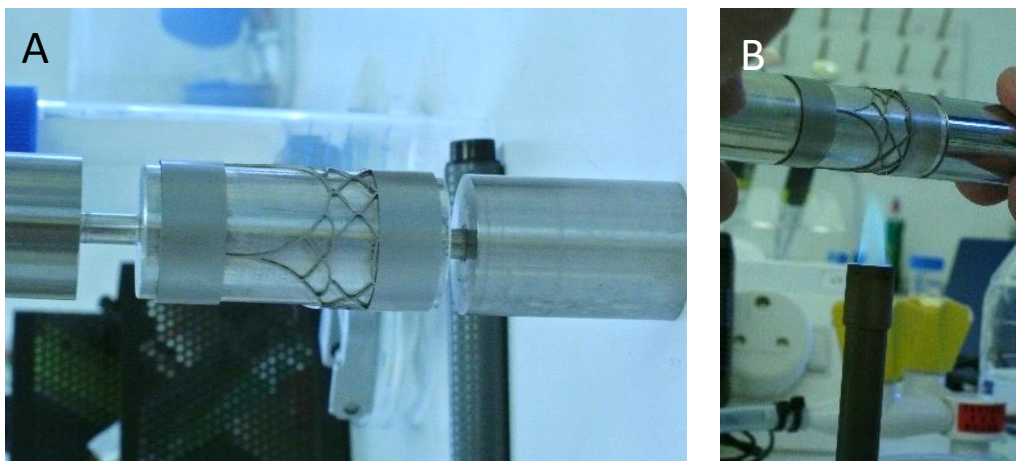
Rolling pin with stent tool (A) and using a Bunsen burner to apply the required heat for bonding (B)
